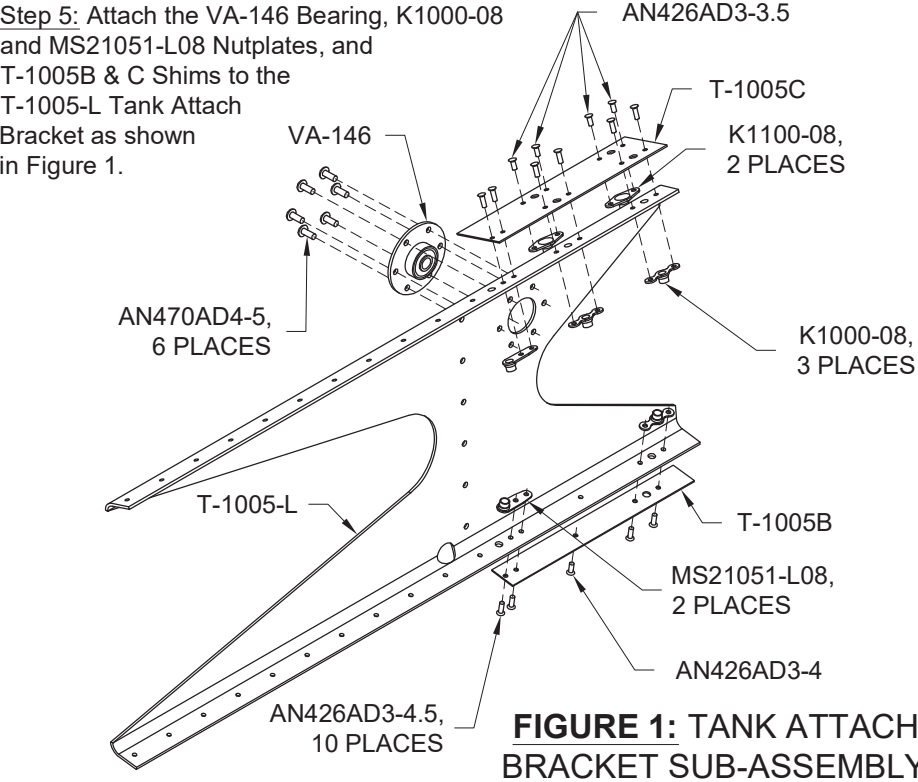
TANK ATTACH BRACKET SUB-ASSEMBLY
